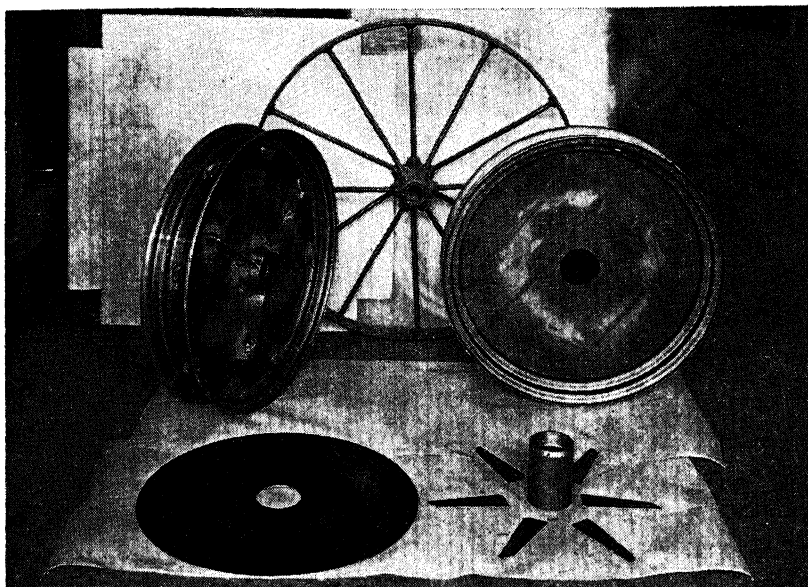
Wheel for a cement buggy. Former construction is shown in background. Welded steel construction, comprising pressed steel rim, plate disc and stiffeners and pipe hub gives modern design of pleasing appearance at low cost.
